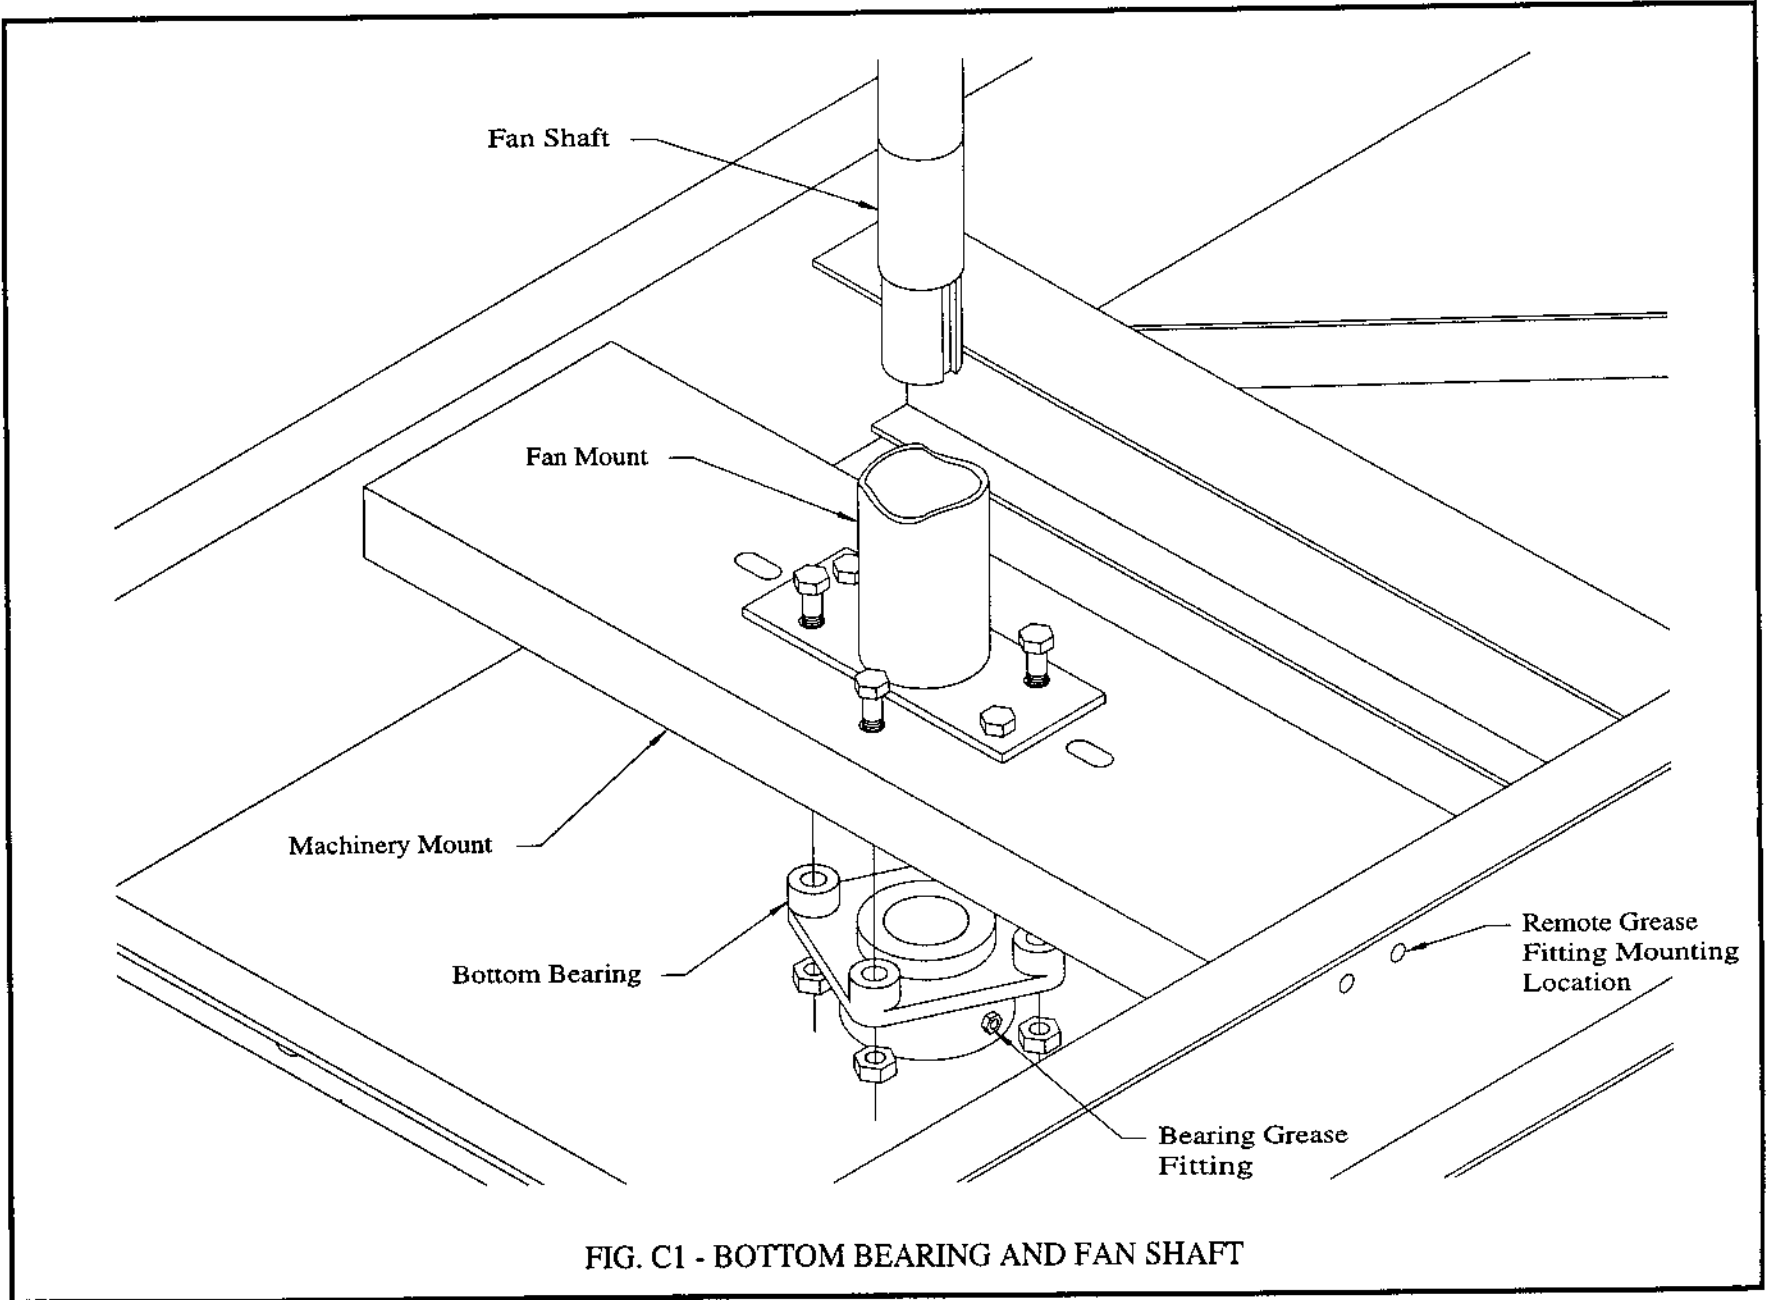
BOTTOM BEARING AND FAN SHAFT
